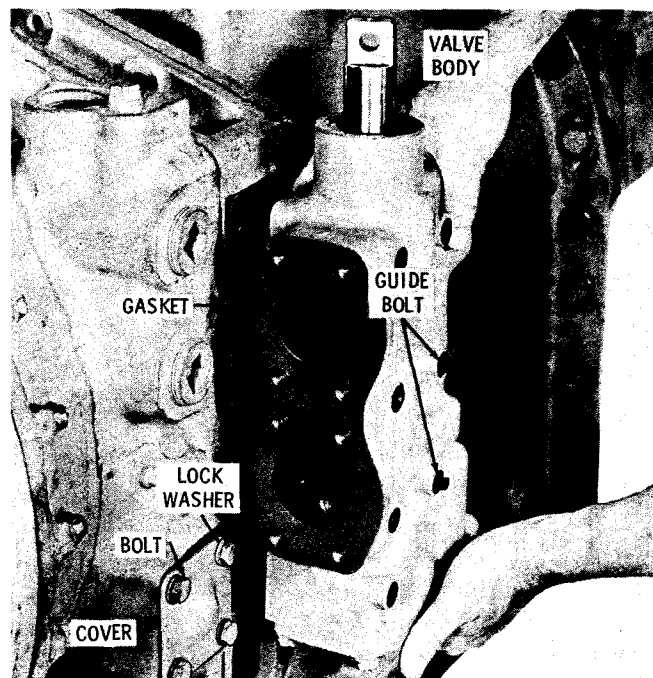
Installing hydraulic retarder control valve body assembly S1740
